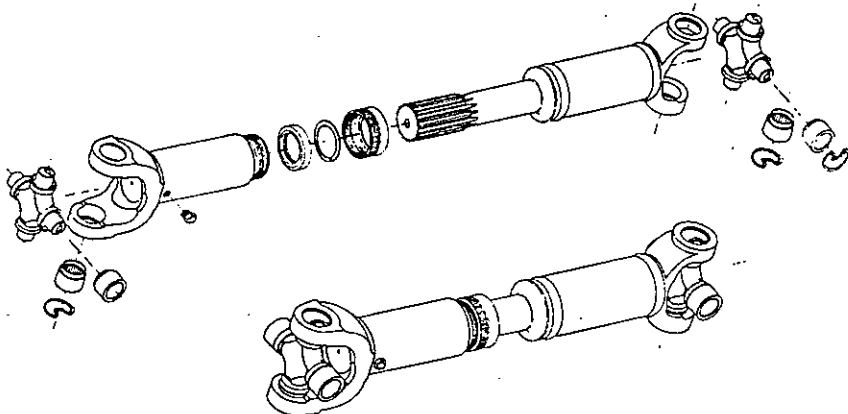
Cross-type universal joints. (Courtesy Dana Corporation.)
